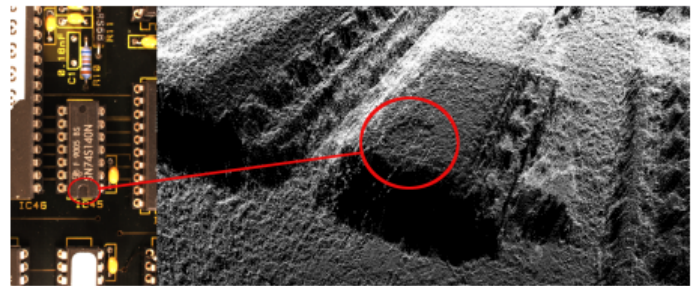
3D Modeling Techniques for PCB Visual Inspection Systems
